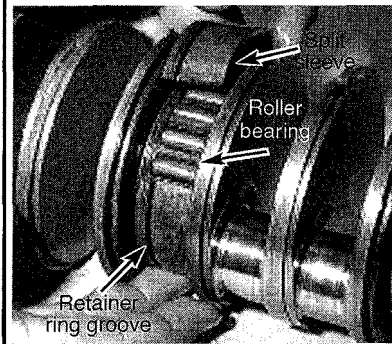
During installation be sure face the retaining ring groove faces AWAY from the flywheel (toward the bottom of the crankshaft)
